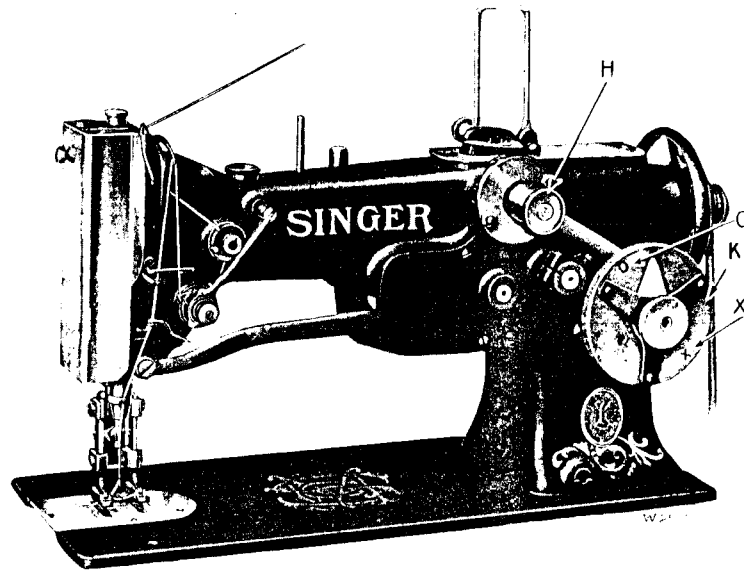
FRONT VIEW OF MACHINE SHOWING PATTERN CAM (K) AND PATTERN CAM FEED REGULATOR (H)
